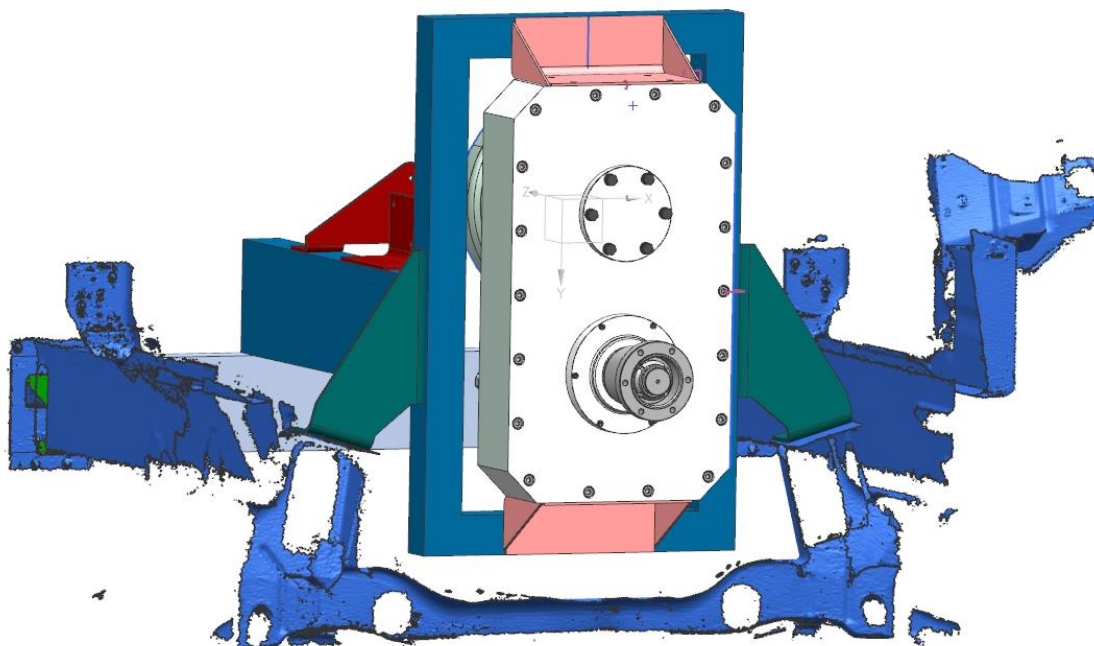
3D view of the gearbox mounted on the chassis of the vehicle
